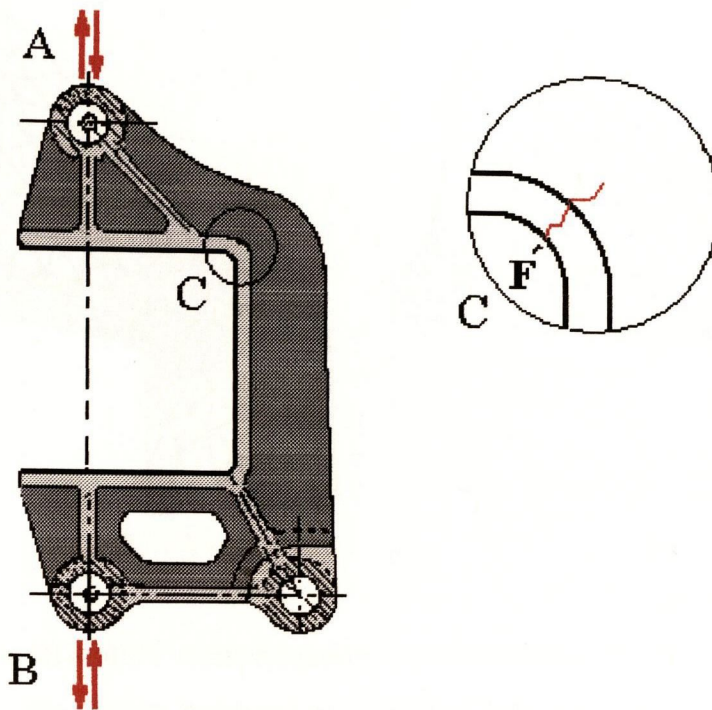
Testing condition of C-shaped bracket; fatigue failure occurred at F'. Tensile loading was applied along AB.
